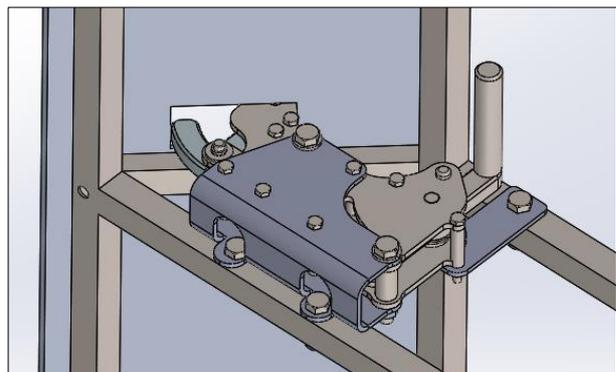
Mechanism as sub-assembly mounted on site into the frame fixing case.
